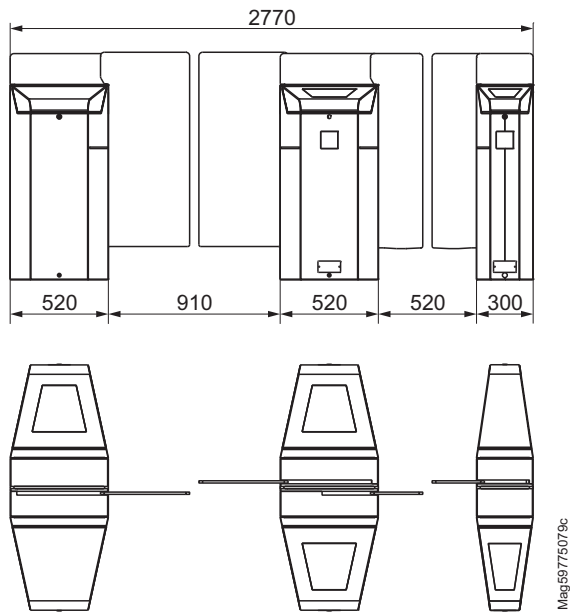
Dimensions – Housing width 300 mm (Standard)/Housing width 520 mm (Wide)
